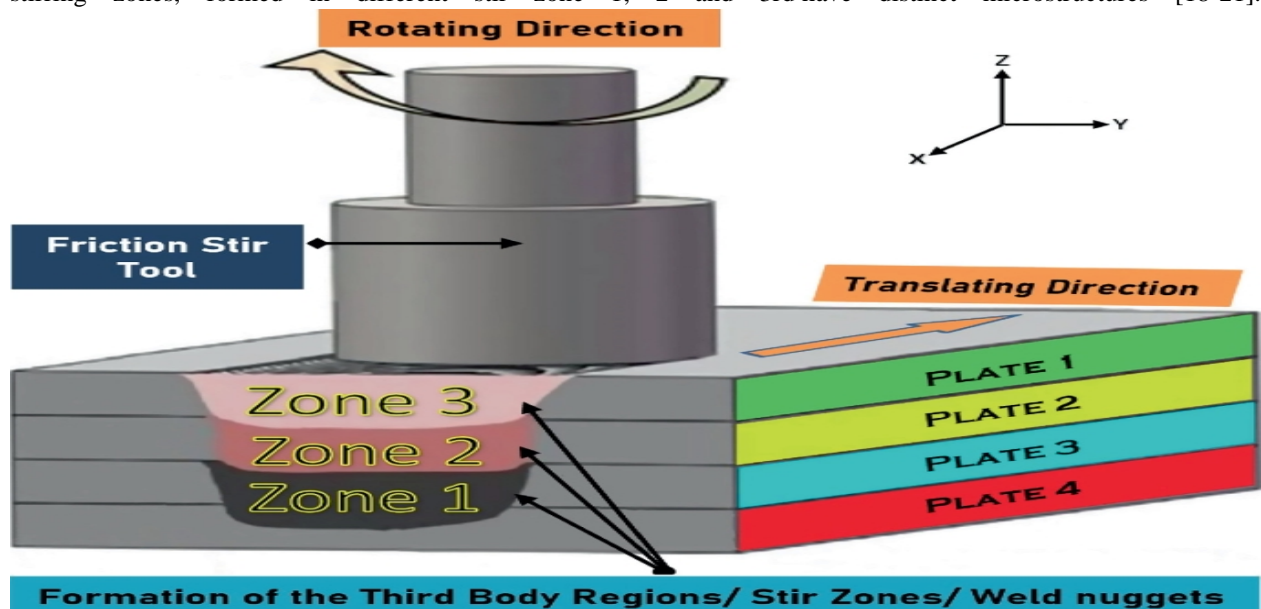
Schematic process for multiple plate additive manufacturing, with different stir zone [17-19].
